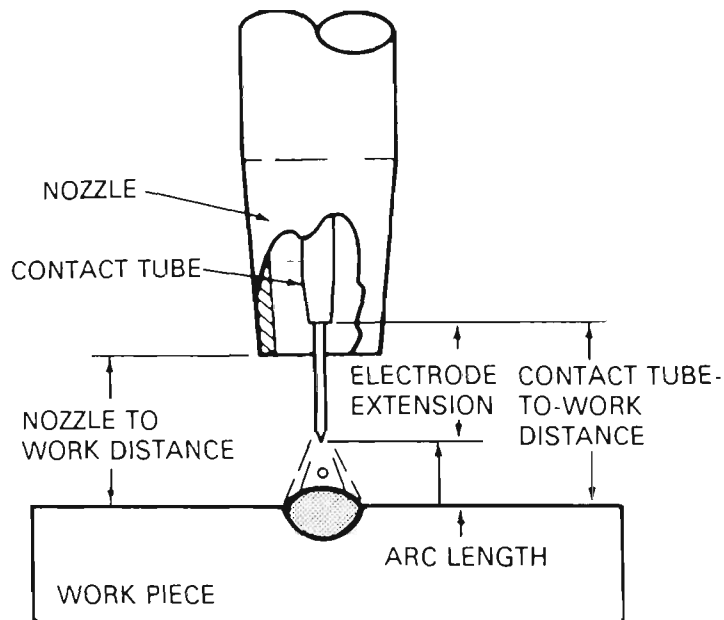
A schematic of physical arc length in electrical terms [After Welding Handbook Vol.2 1991].
